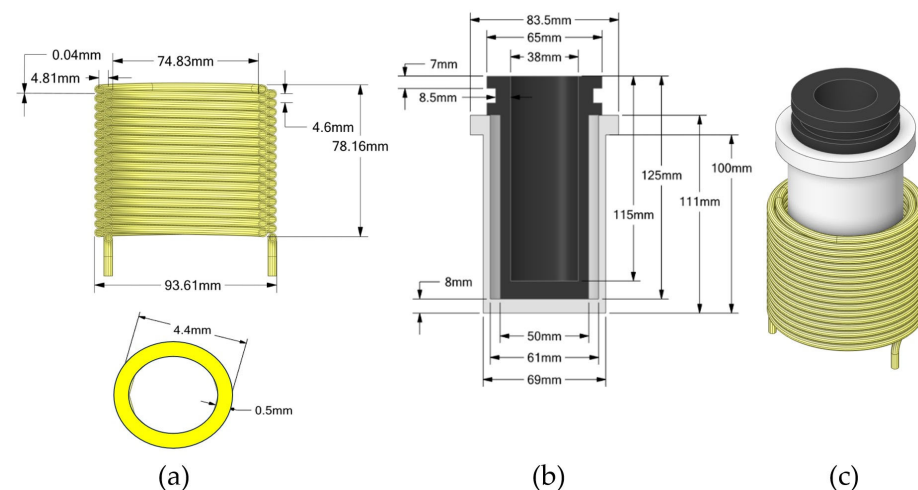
The CAD model with dimensions for (a) coils, (b) jig and crucible, and (c) SIF.
